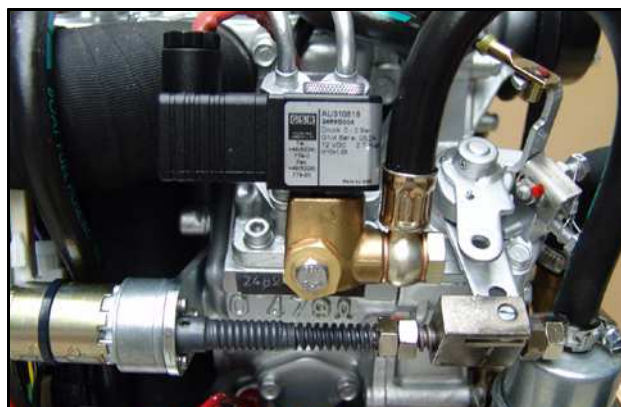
Vent Screw at the Fuel Solenoid Valve
